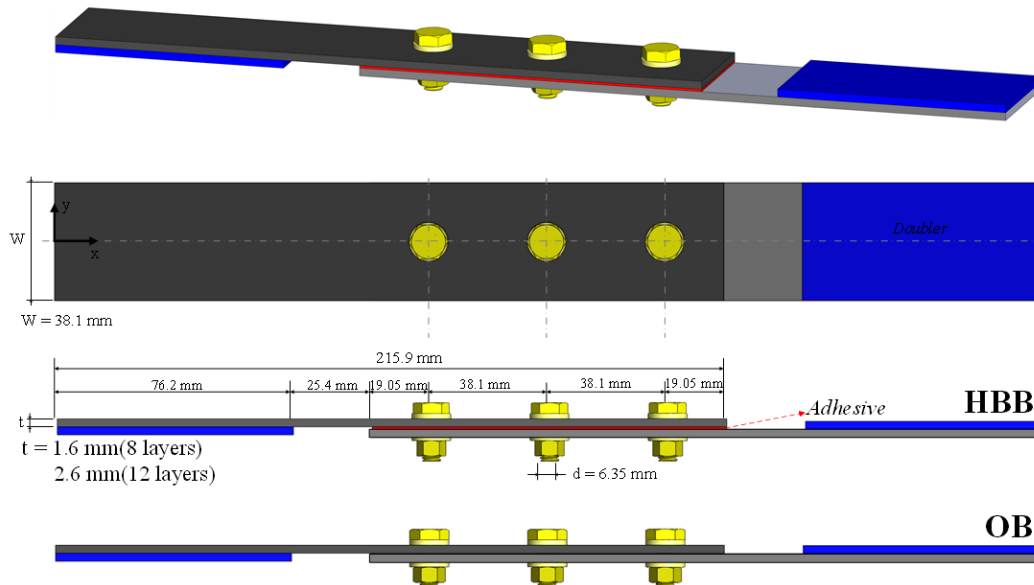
Specimen geometry and dimensions used for OB and HBB SL joints.
